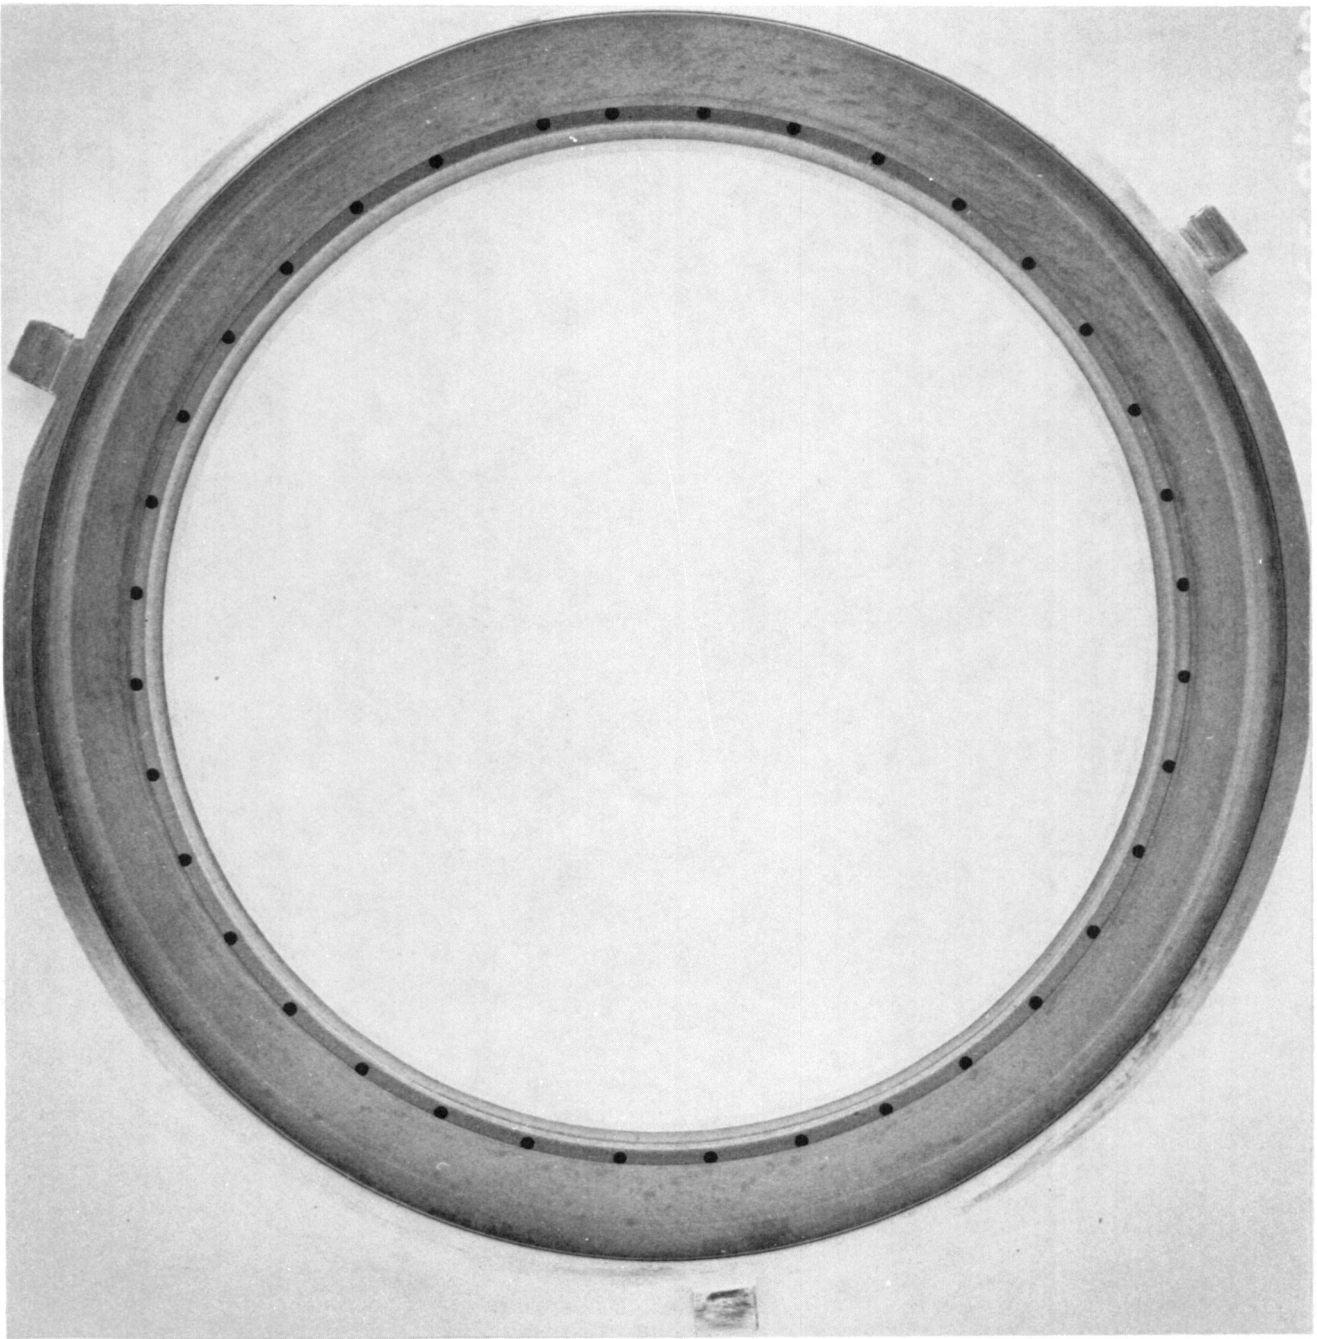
LOX Seal Carbon Ring P/N 7R0012691-11, S/N 02, Posttest 048
